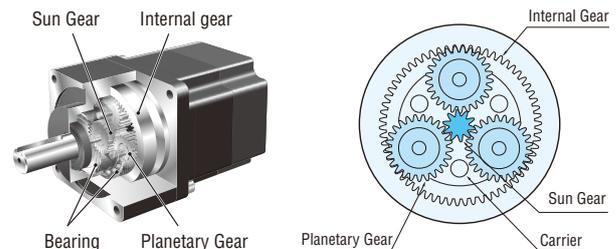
Example of Planetary Gear Reduction Mechanism (PS geared type)
